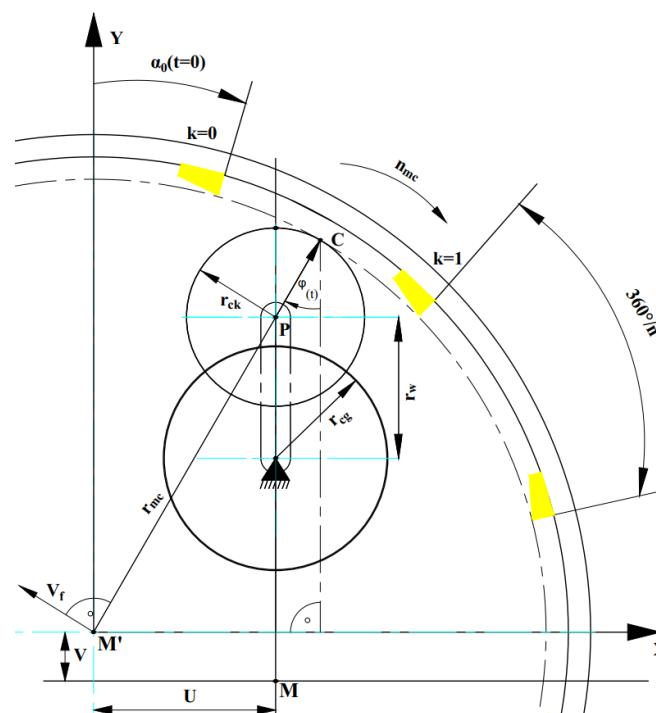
Machining model of the crankpin during planetary milling with use of an internal disc milling cutter
